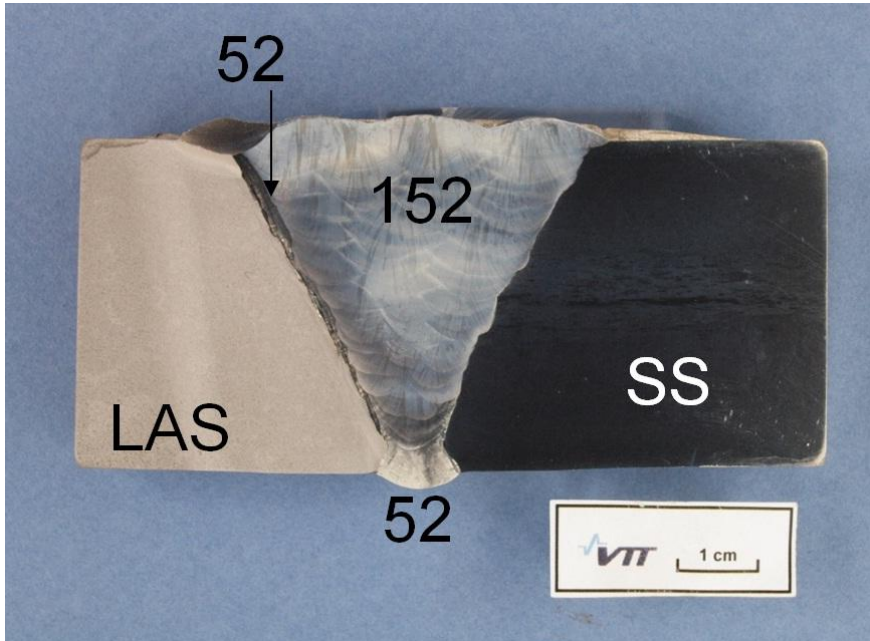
A photograph of KAIST mock-up (Alloy 152) test block cross-section (polished and etched) showing low alloy steel and stainless steel base materials, Alloy 52 butter and root and Alloy 152 weld.
